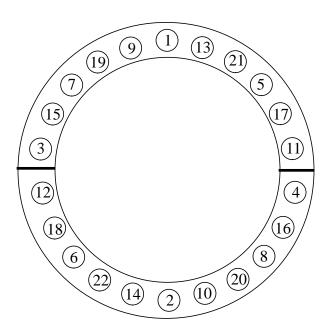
The diagram shows the tightening order of bearings in the heavy duty split frame. View is looking down onto rotating ring. (Different sized machines will have different numbers of bearings.)
